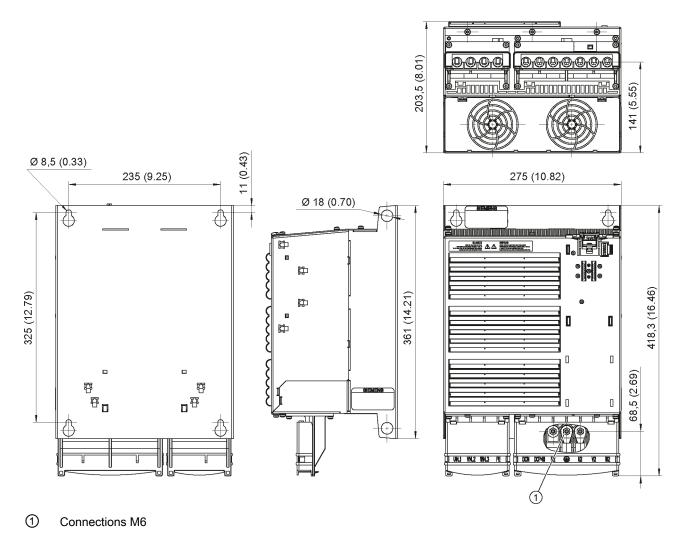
Dimension drawing, PM340 Power Module, frame size FSD (without integrated line filter); all dimensions in mm and (inches)
